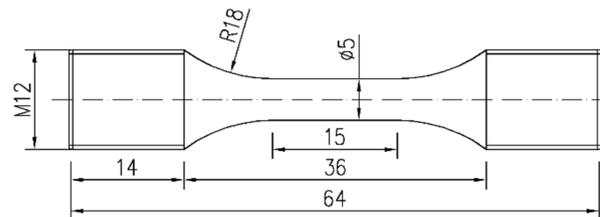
Geometry and dimension of the specimen used for $S-N$ measurement- dimension in [mm].
